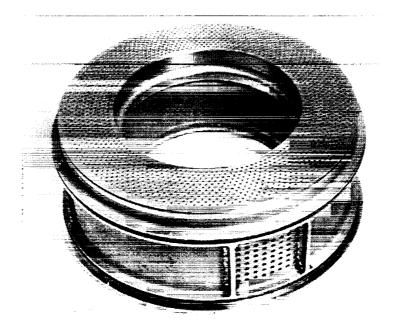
Completed SPDE Cooler Ready for Installation into Heater Head Assembly
